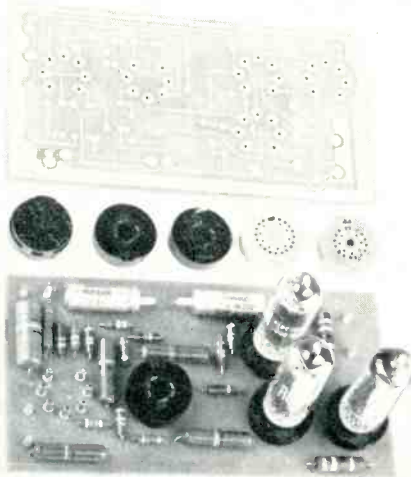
Experimental five-tube a.c.-d.c. amplifier made with printed circuit technique, miniature tube socket adapters, and Auto-Semby system of fabrication.
